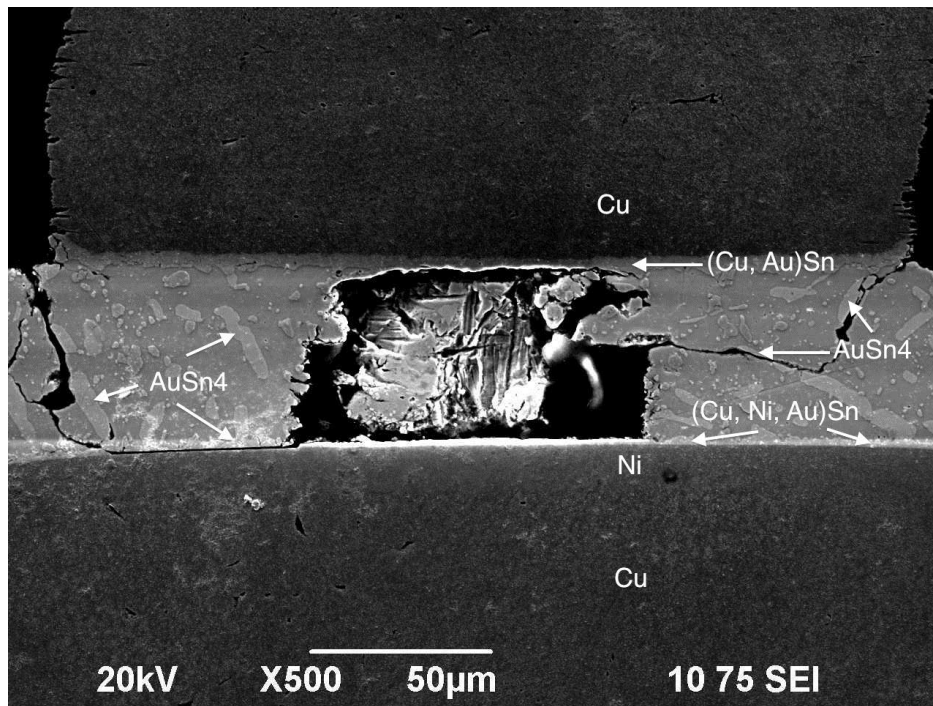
Fracture in AuSn₄ IMC in the interface near board side and crack in AuSn₄ IMC in the bulk solder, a QFN component on a thick Au board, after thermal aging for 56 days
